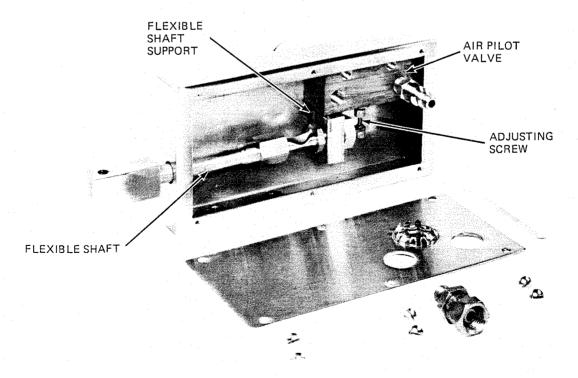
Model 30-103 and 30-104 Level Control - Disassembled
